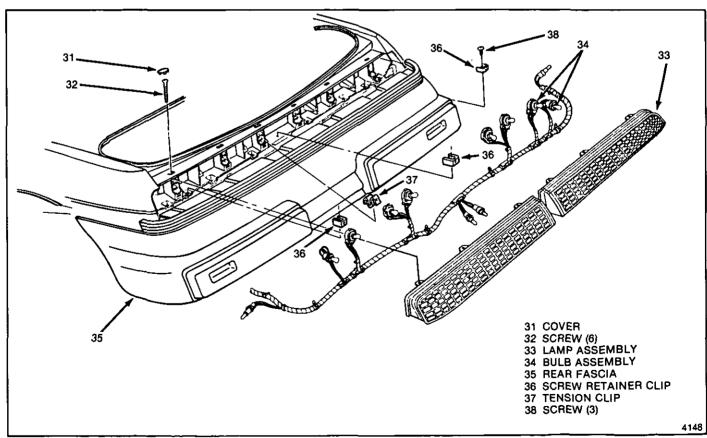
Tail Lamp Assembly - 37 Style Shown, 97 Style Similar
